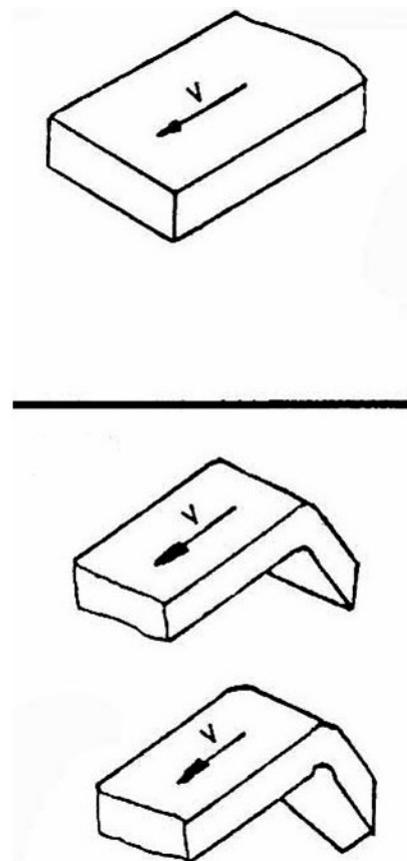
Flat impact scraper and cranked drawing scraper (after Autorengruppe TAG 2016, p. 38).
